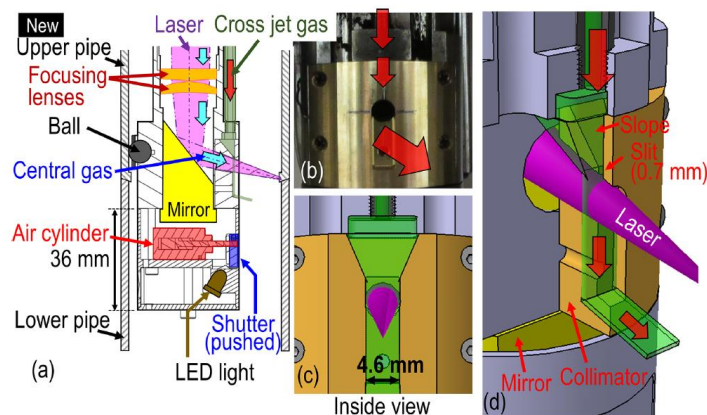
New design of the laser welding bore tool with added shutter and updated cross-jet gas line for JT-60 SA [106]
